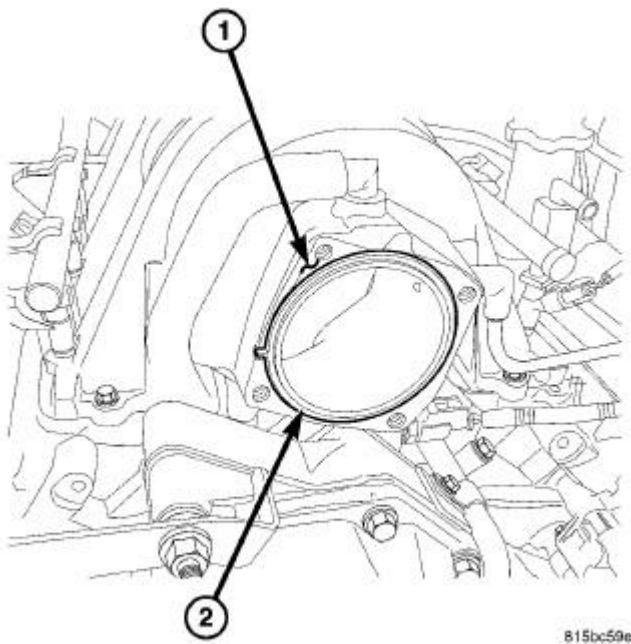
Throttle Body O-Ring At Front Of Intake Manifold
